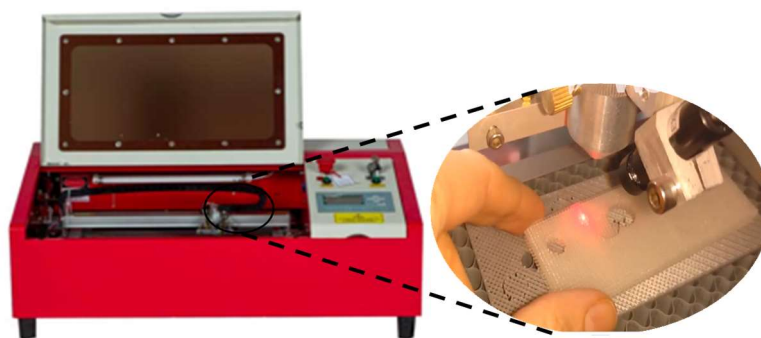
4. A Laser cutting machine (LS3020, HPC Laser LTD, UK) used for fabricating PLA scaffolds from printed porous bar.
